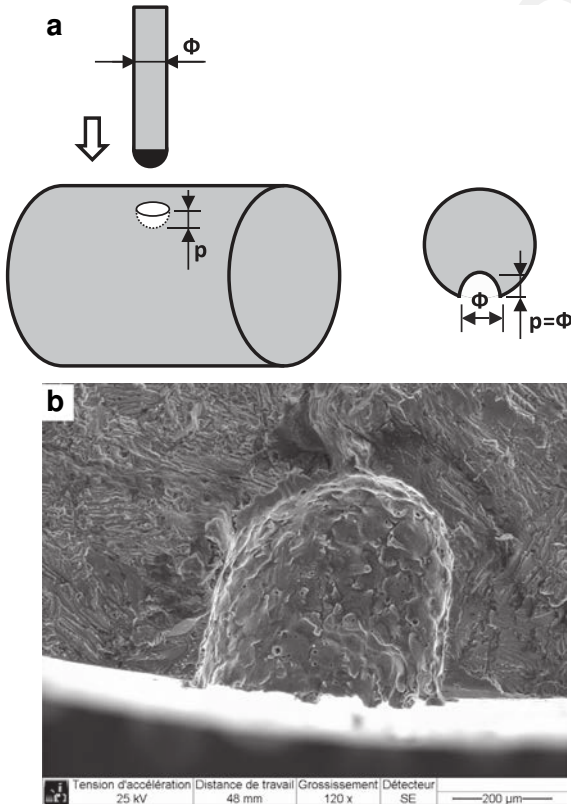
Artificial defect: (a) spark erosion machining principle; (b) artificial defect on the specimen after fracture (SEM).
